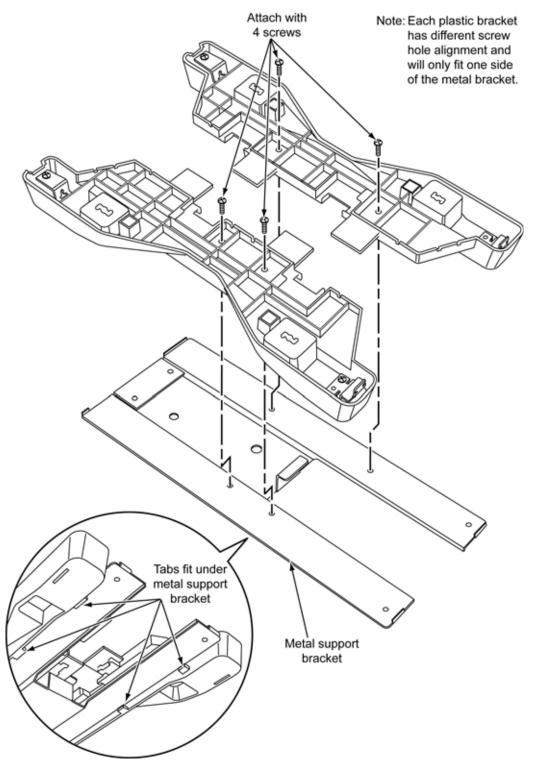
9.5" Mounting Brackets and Metal Expansion Fitting
